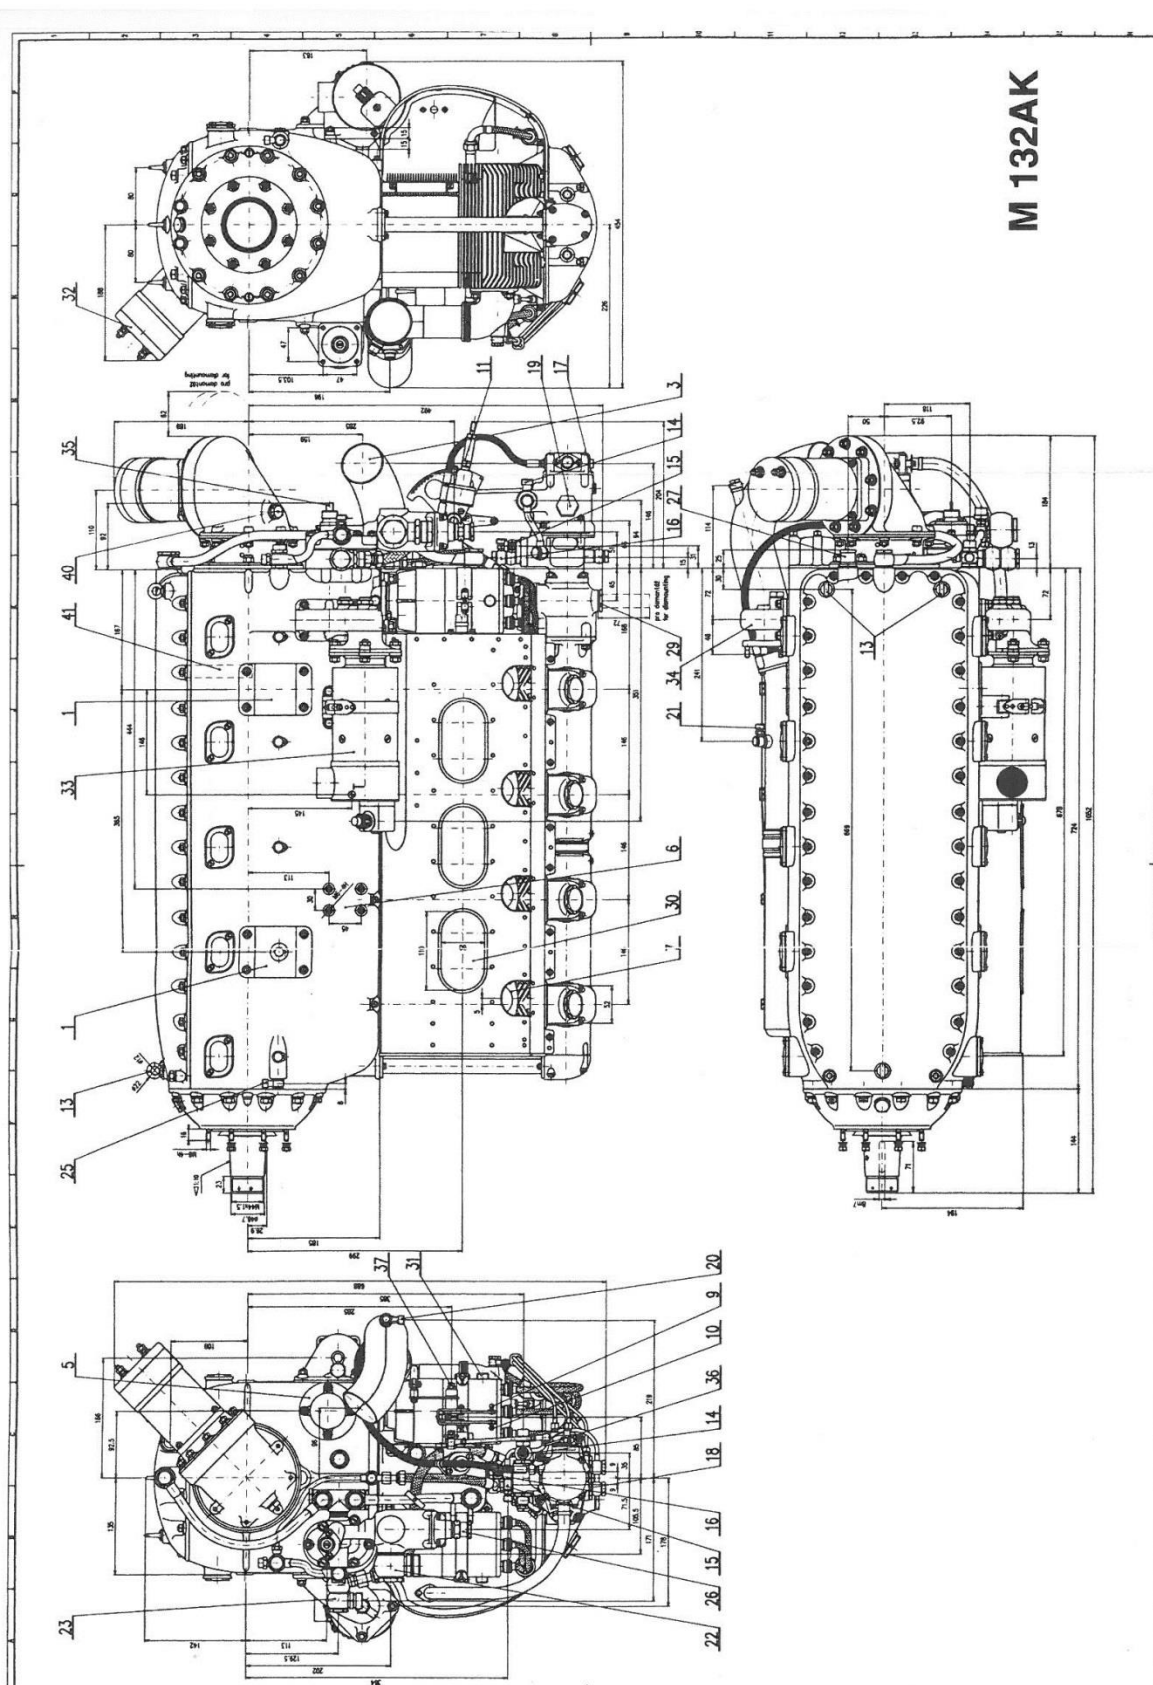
Miniature of Installation drawing of engine M132AK
